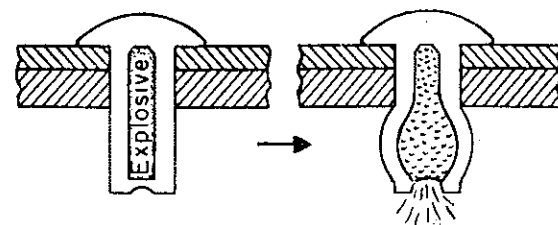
Explosive rivet as it looks before (left) and after (right) setting into metal.
